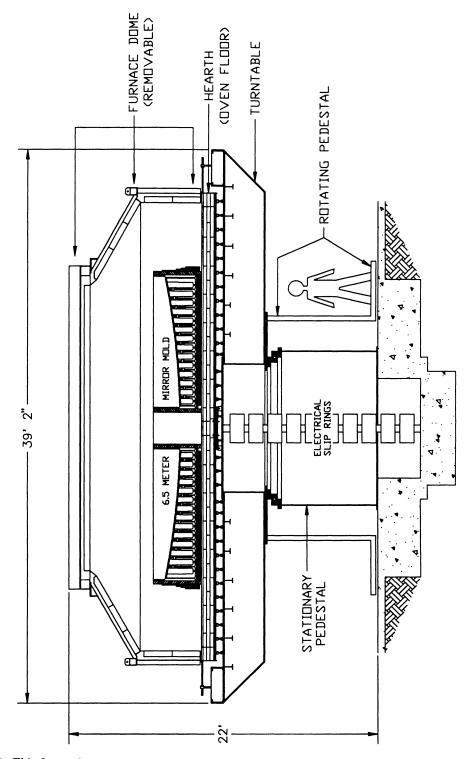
This figure shows a cross section of the rotating furnace with the 6.5 meter honeycomb mold inside.
